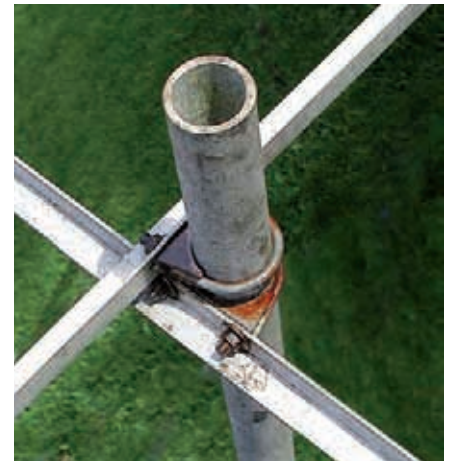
Method of constructing a robust spider for a large antenna using angle aluminium and car exhaust clamps.
